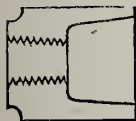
represents the hollow or cup-chuck; it is used for holding short pieces, or pieces that are to be turned out hollow. Its inside is turned slightly conical, so that the work may be driven tightly into it.
